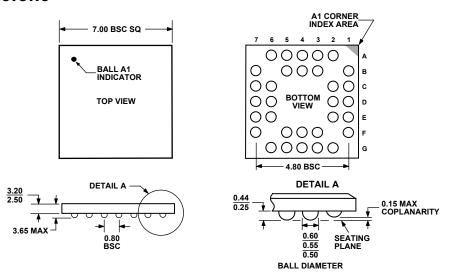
32-Lead Chip Scale Ball Grid Array [CSPBGA] (BC-32) Dimensions shown in millimeters
